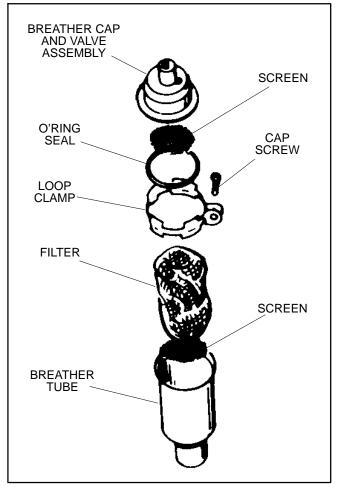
CRANKCASE BREATHER ASSEMBLY
